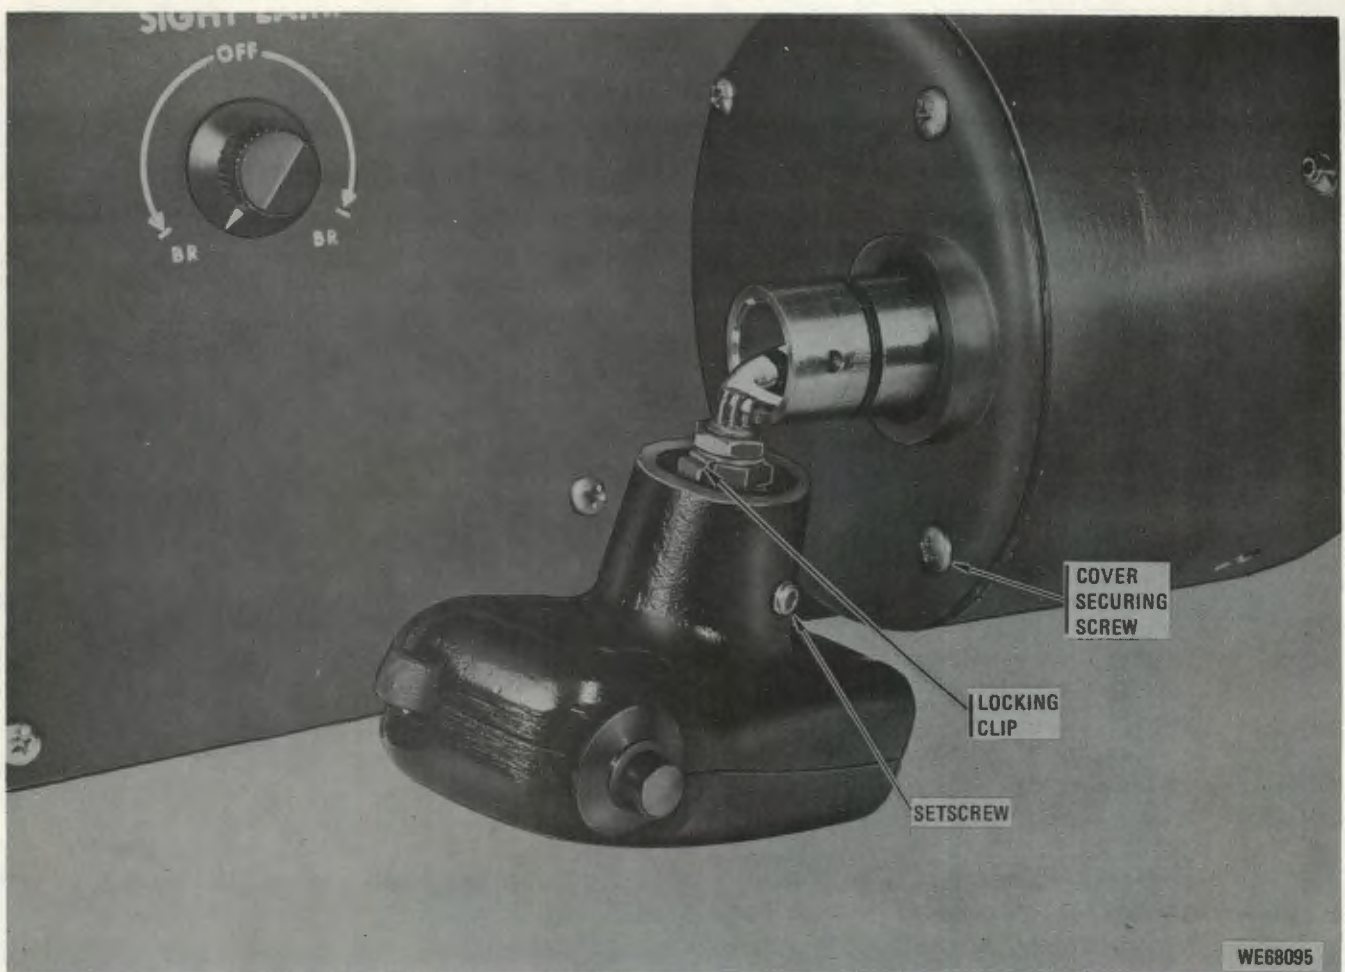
Elevation control assembly, left grip assembly removed, location of locking clip.
